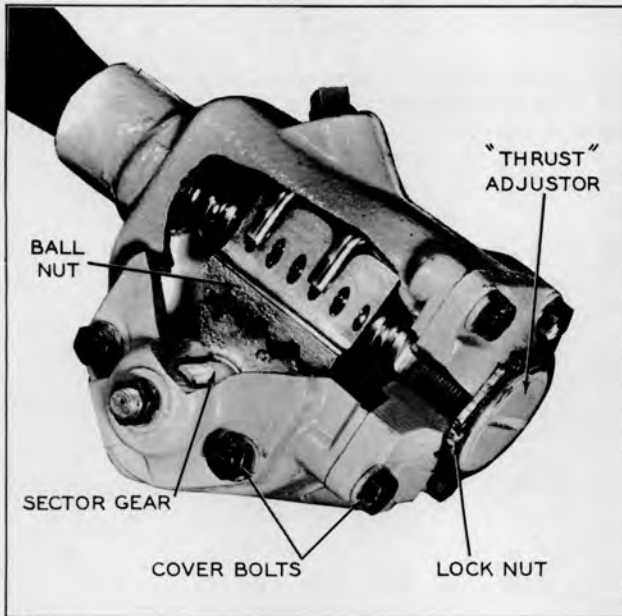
Steering Gear Thrust Adjustment (Worm Bearings)
